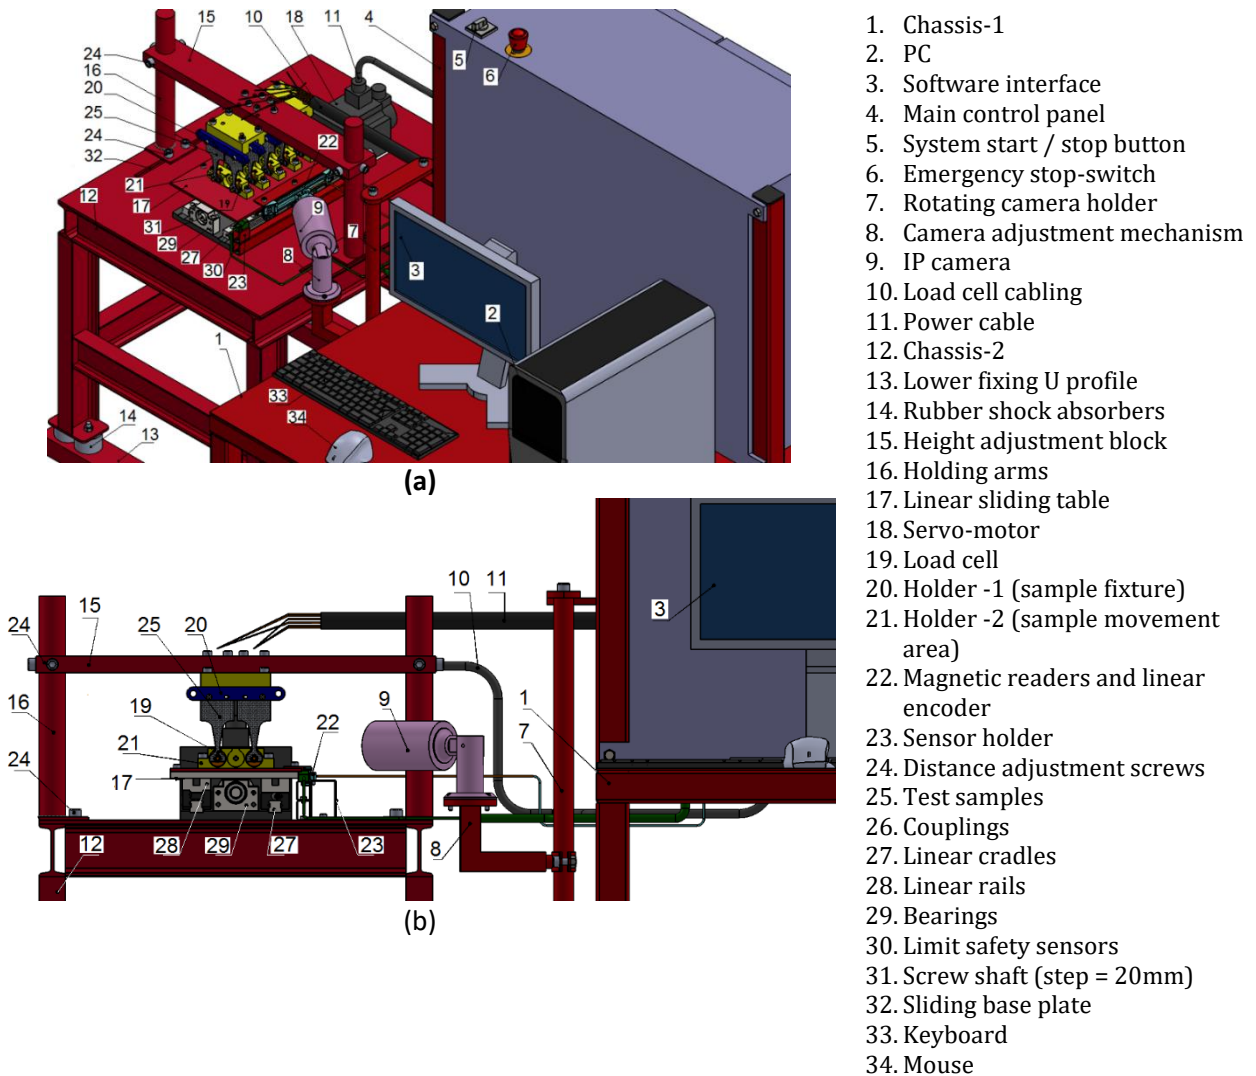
The components of multi-sample fixed-end type flexural fatigue test machine [14]
